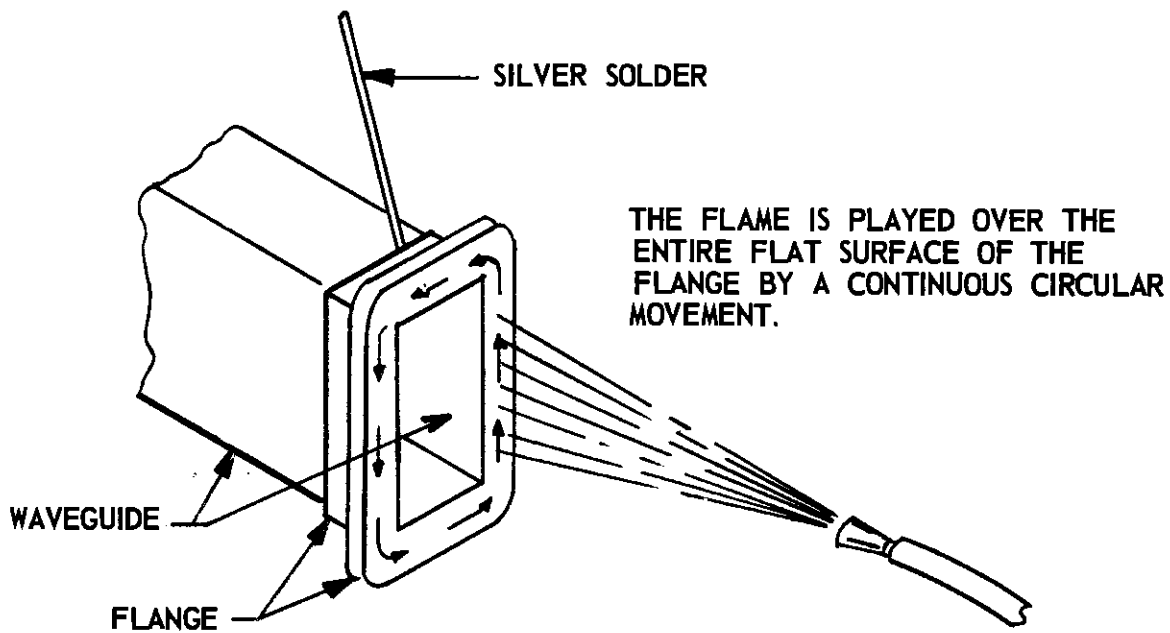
Silver Soldering Waveguide and Flange - Sleeve Design
